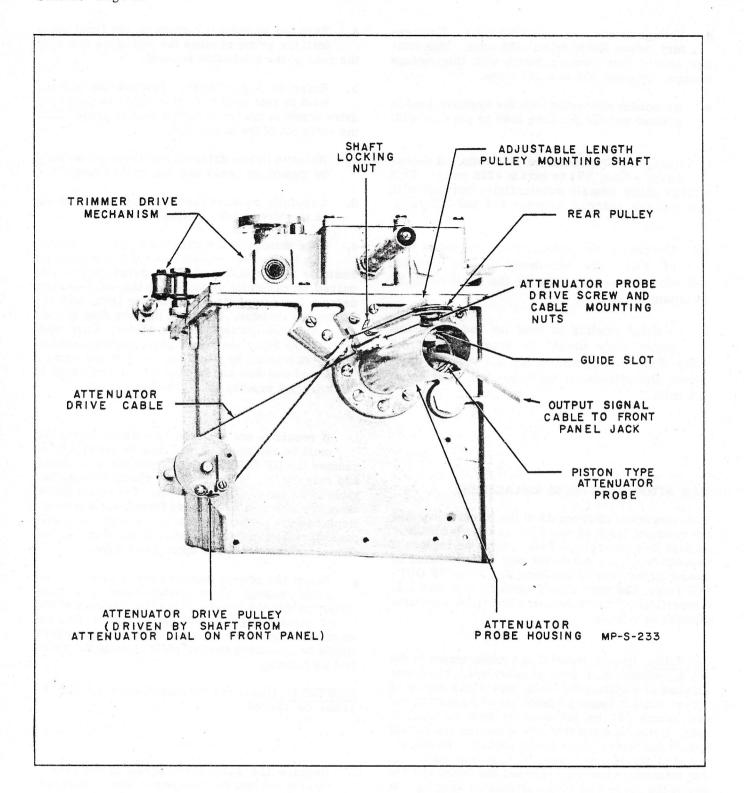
R-F Generator Assembly Rear View, Showing Output Attenuator Drive System
